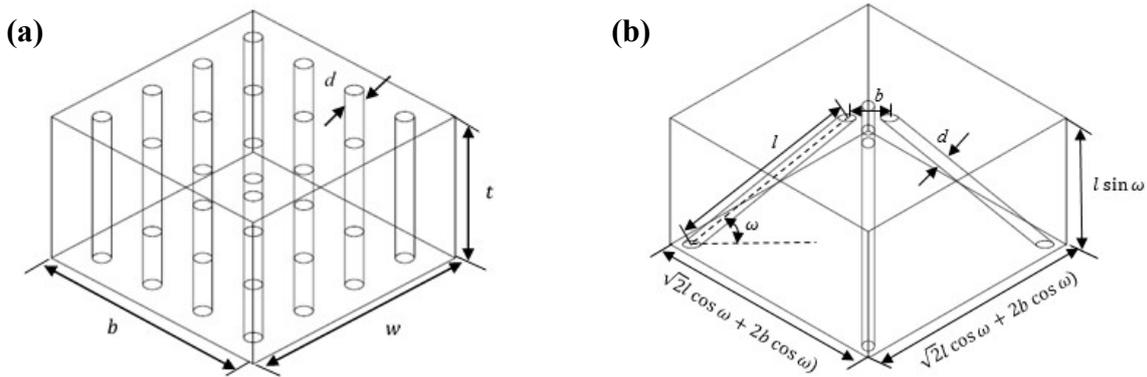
Schematic of the unit cell lattice truss core sandwich structures. (a) columnar and (b) pyramidal
